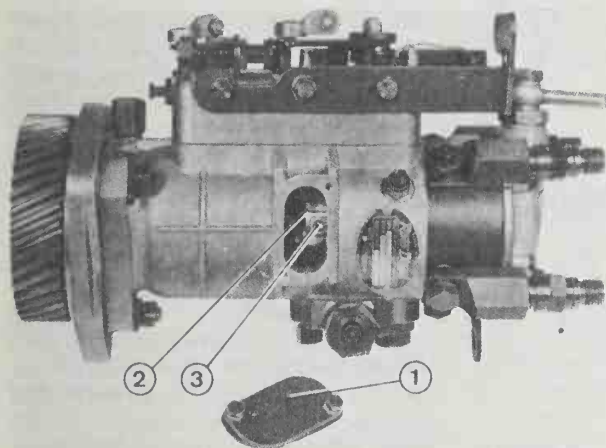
View of Roto Diesel fuel injection pump with inspection plate (1) removed showing timing groove (2) and timing pin guide (3).
